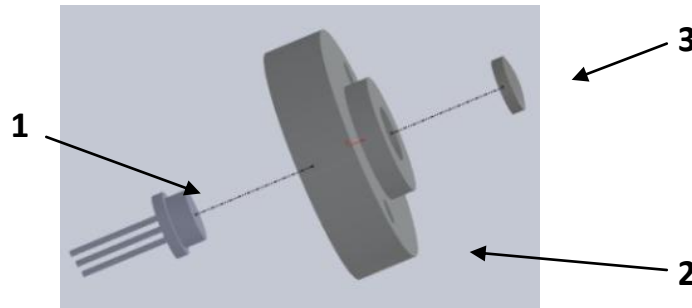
Upper Laser Diode and Lens Assembly (A) – (1, 2, 3)
